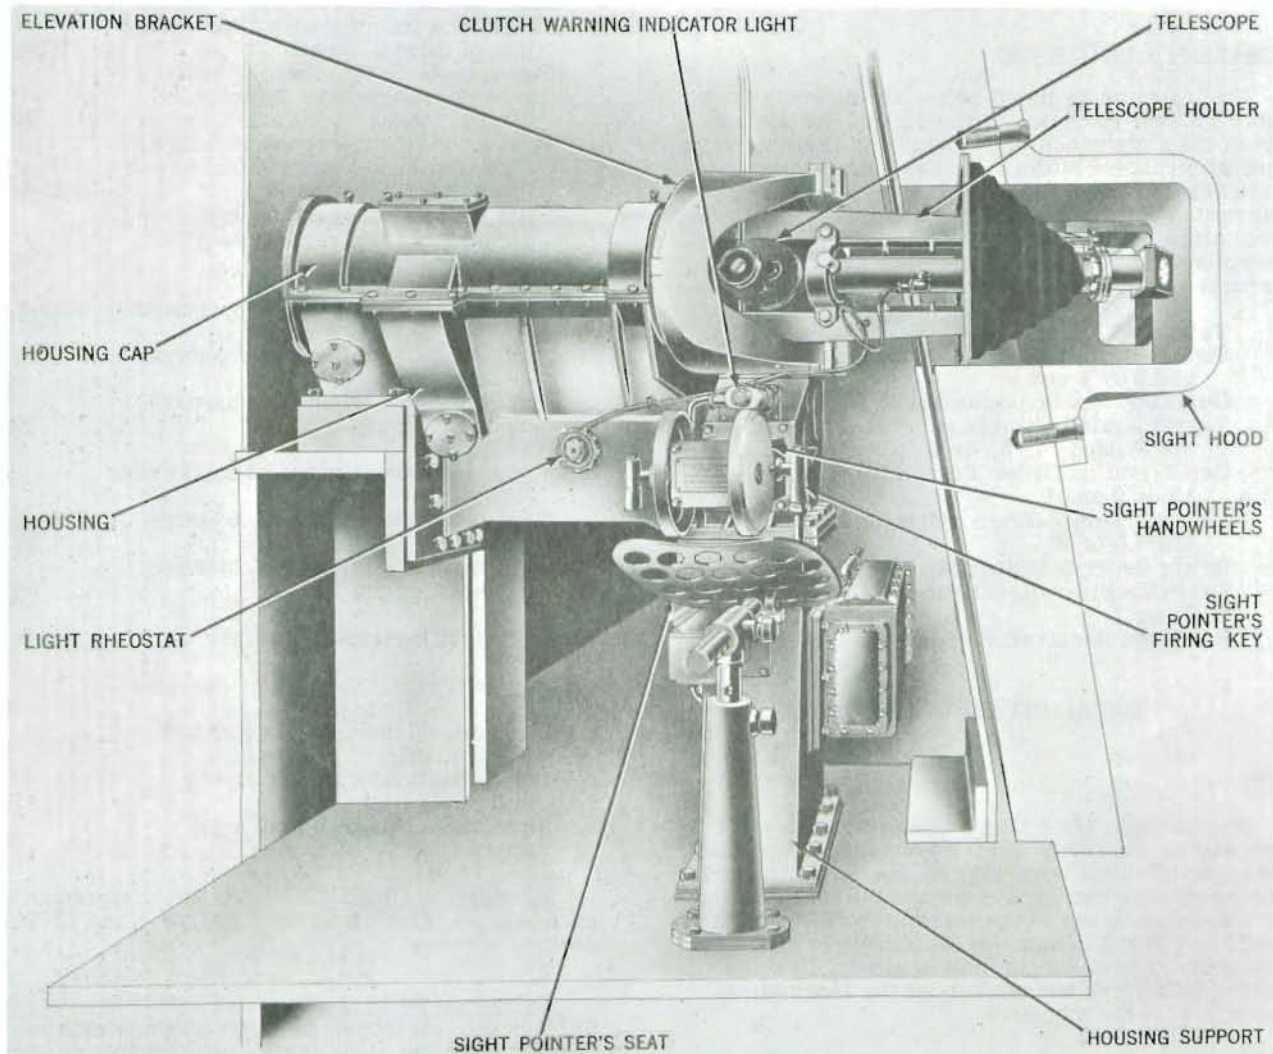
Sight Pointer's Station, 16-inch Sight Mk 4, Mod 2 or 3, General Arrangement
